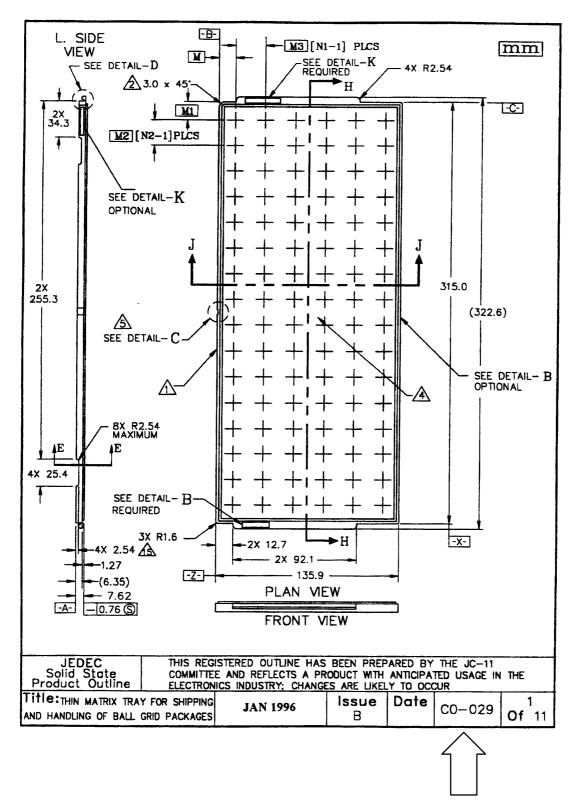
Example of a Carrier Registered-Outline Drawing Top Sheet
